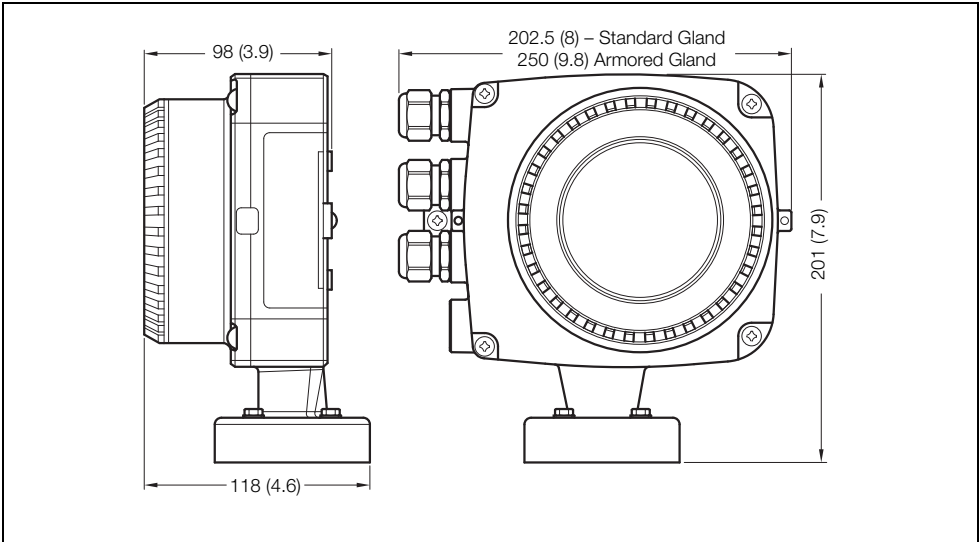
Integral Transmitter Dimensions (Standard Gland Shown)
